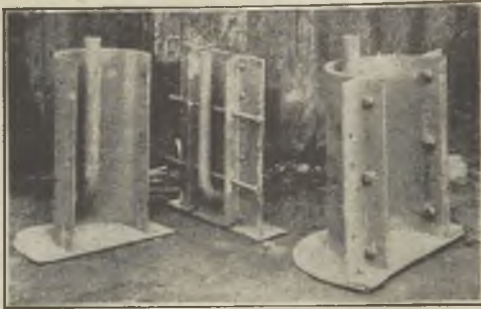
"FORMERS" USED IN FILLING BEARINGS.
